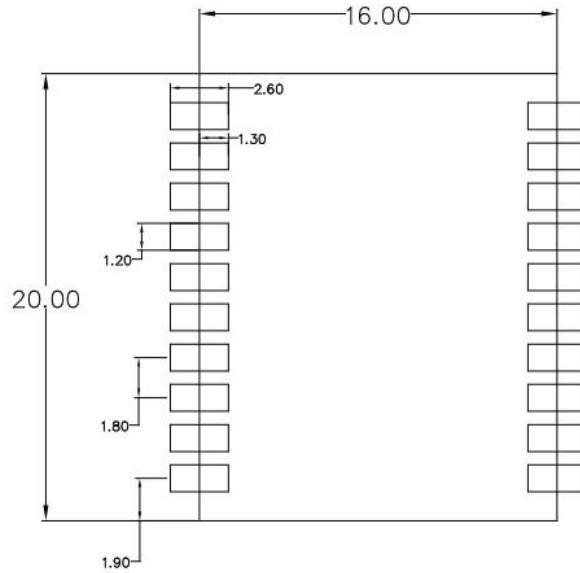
Recommended PCB Footprint Dimensions (Unit: mm)
